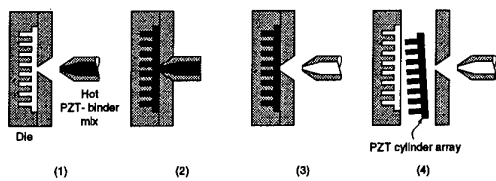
A schematic diagram showing the injection molding process used for low cost manufacturing of ceramic cylinder array. (1) Hot powder-binder mixture in a nozzle. (2) Injection of mix into die. (3) Mix cools to form a solid (green) part. (4) Net-shape array is ejected [38].
